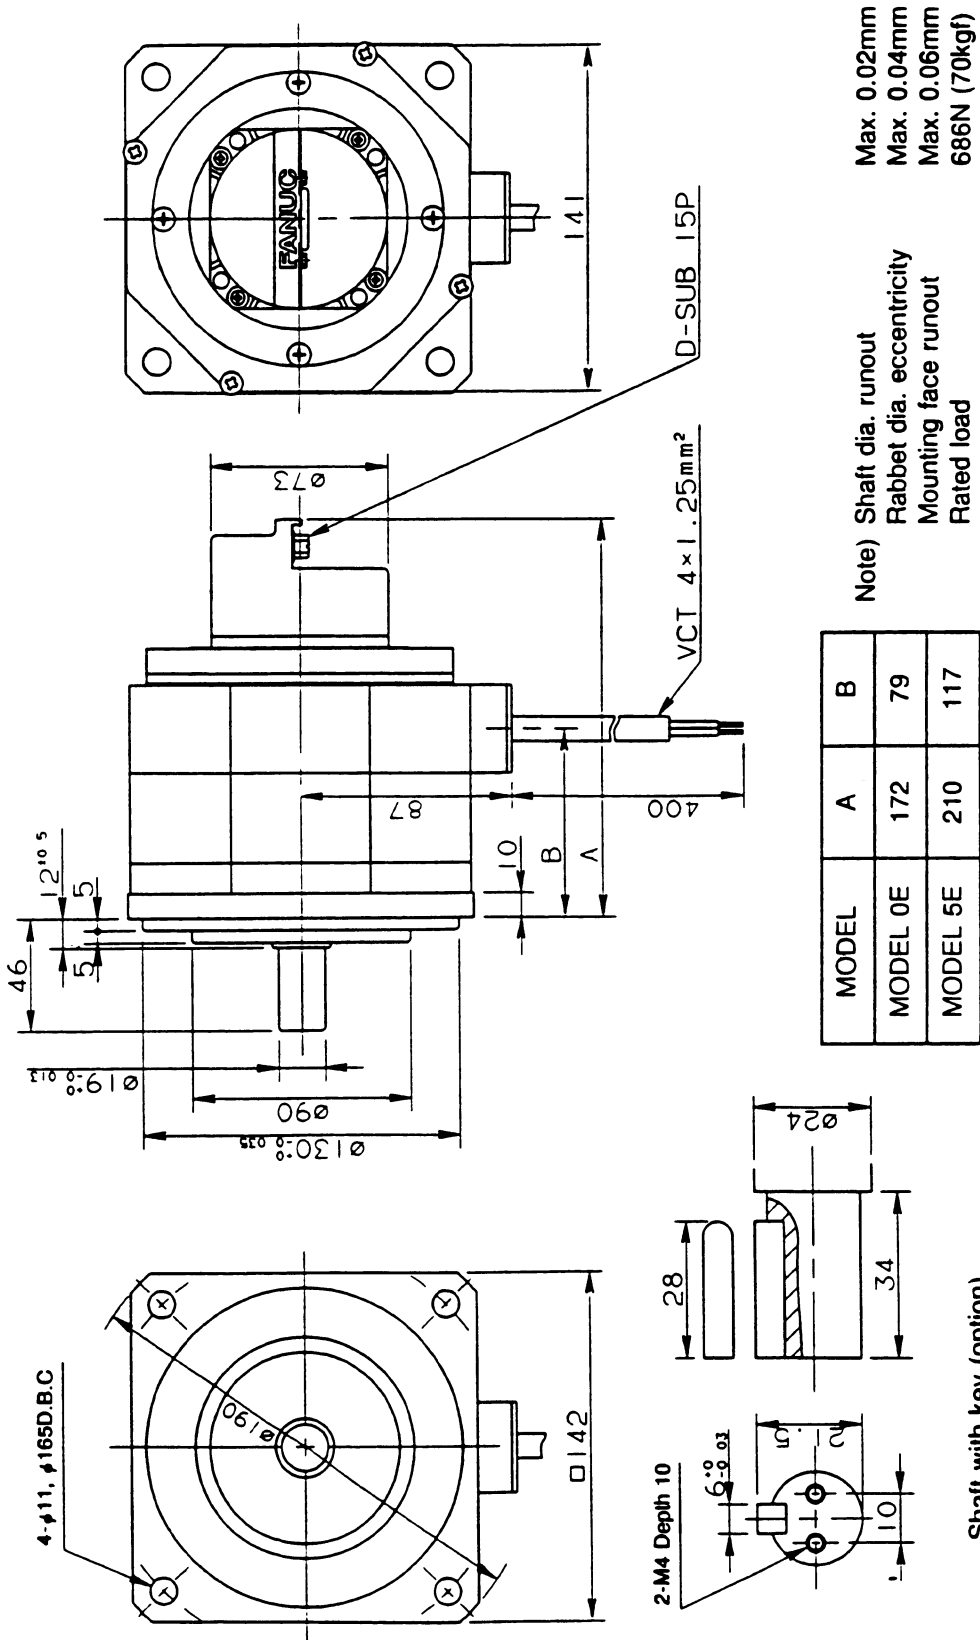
(f) AC Servo Motor 0E, 5E External View
